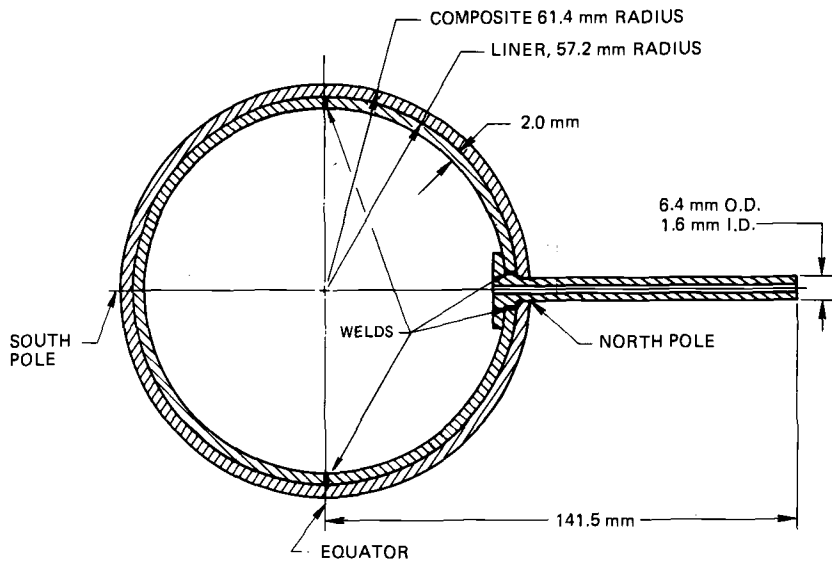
Cross-sectional view of test specimen showing component parts.
